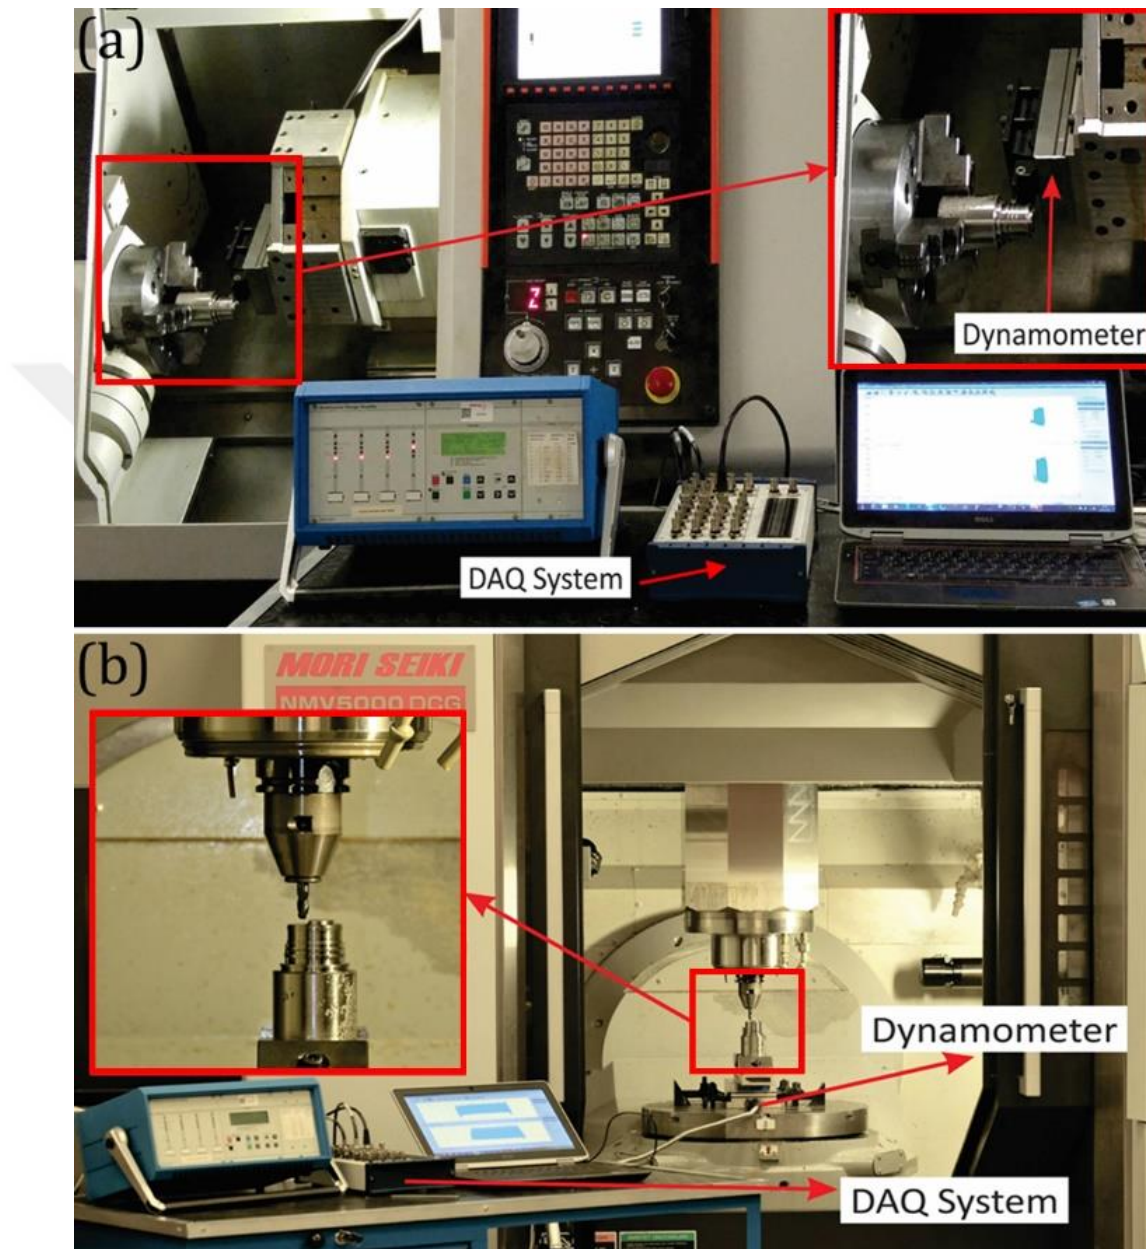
(a) Orthogonal turning setup for 48-2-2 γ -TiAl machining, (b) Milling test setup for 48-2-2 γ -TiAl machining.
